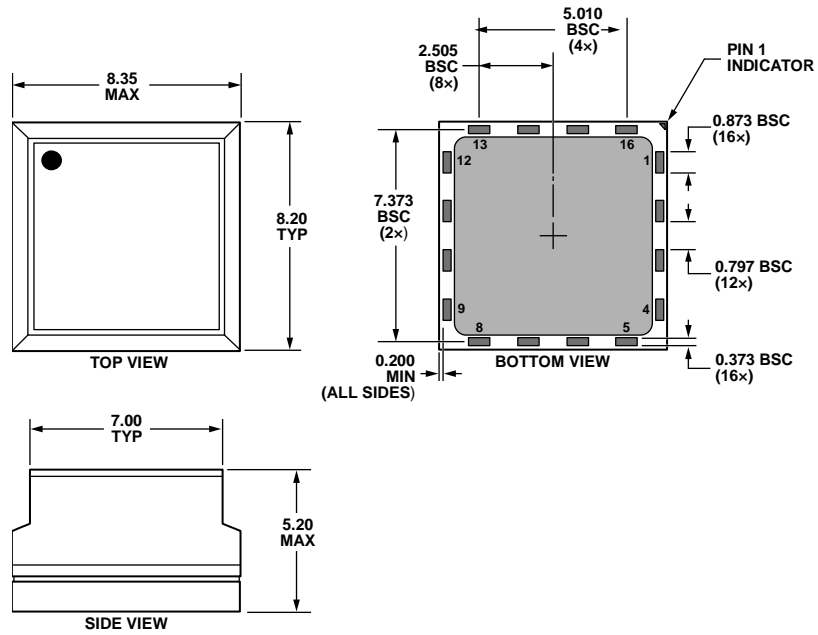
16-Terminal Stacked Land Grid Array [LGA]
